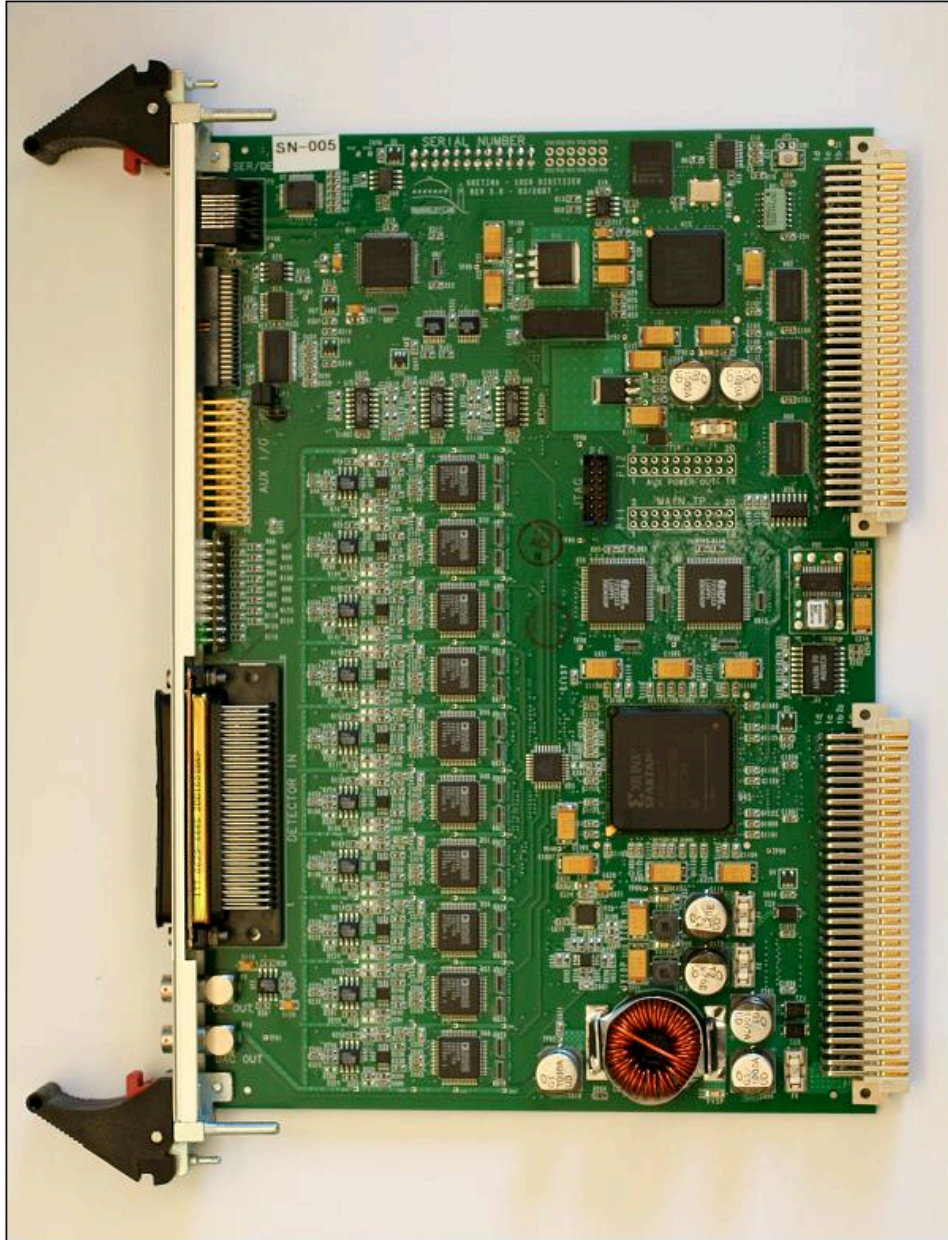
Rev3 DIGITIZER COMPONENT LAYOUT
